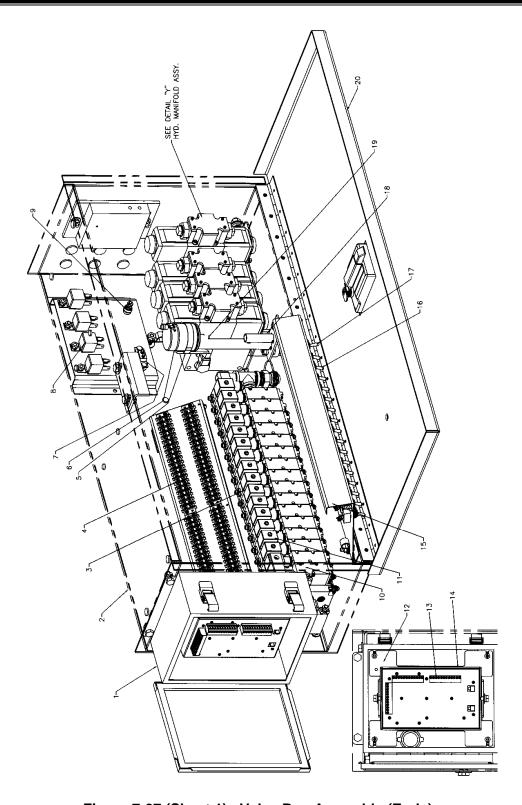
(Sheet 1). Valve Box Assembly (Early)
